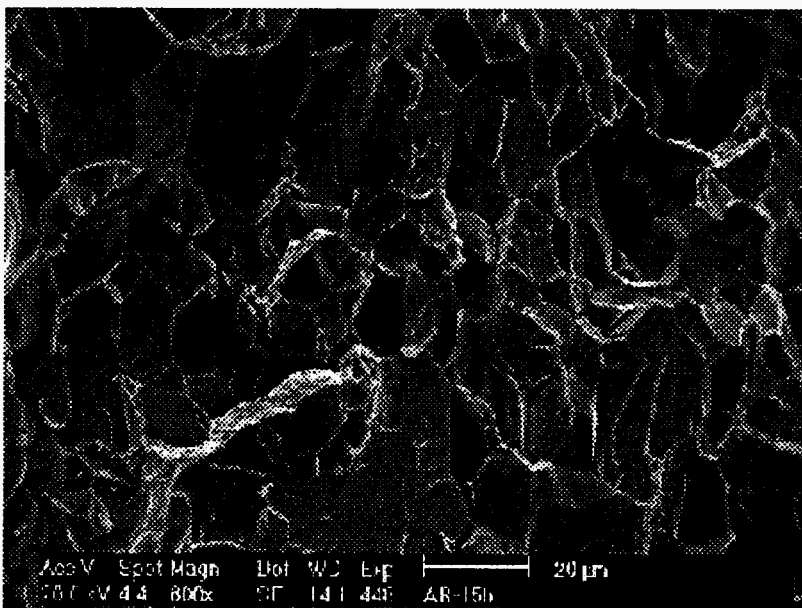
Final fracture surface showing mixed intergranular/transgranular cleavage – as-rolled condition (specimen AR15).
